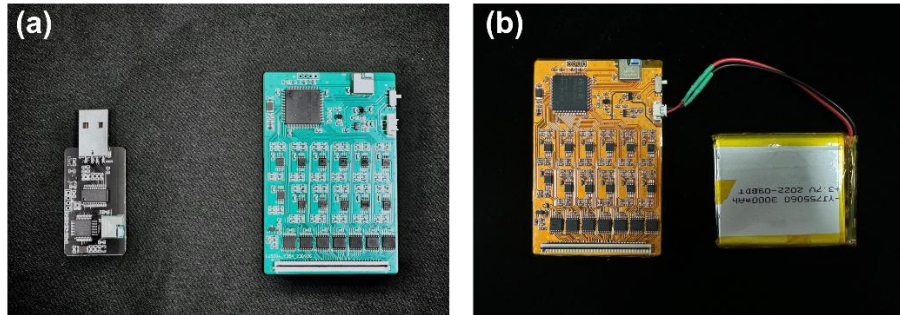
PCB & Flexible PCB for data acquisition systems. (a) Hardboard PCB with Bluetooth transmission USB interface. (b) Flexible PCB connected with 3000 mA·h Lithium battery.
